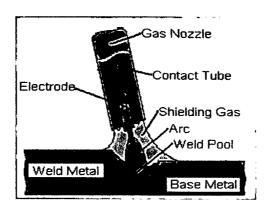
Basic structure of Metal Inert Gas (MIG) welding.
